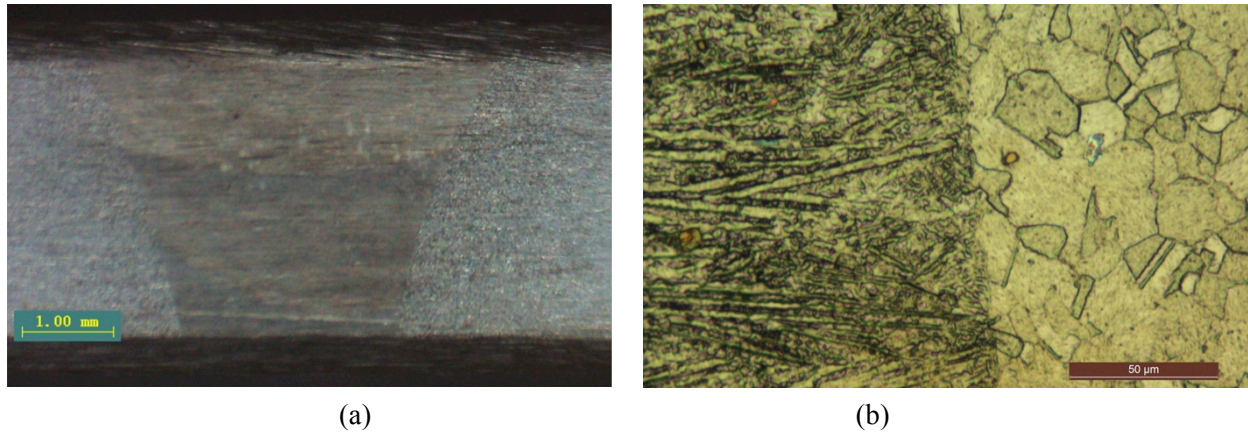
(a) Macroscopic view of the weld joint and (b) Microstructure of the fusion boundary.
